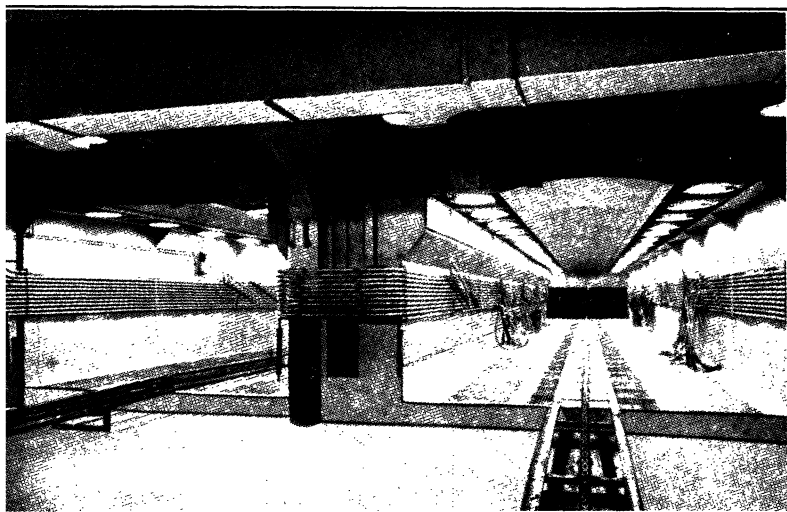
Assembly-Line Paint-Spray Booths (Courtesy National Safety Council)
